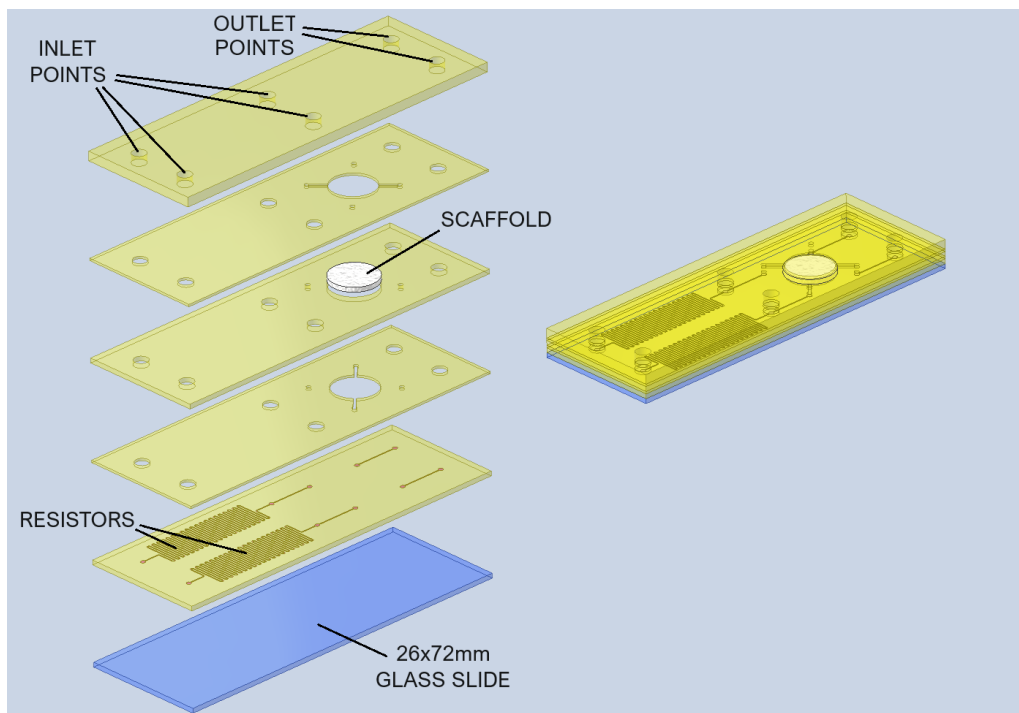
3D CAD drawing of the exploded and bonded bioreactor-on-chip.
